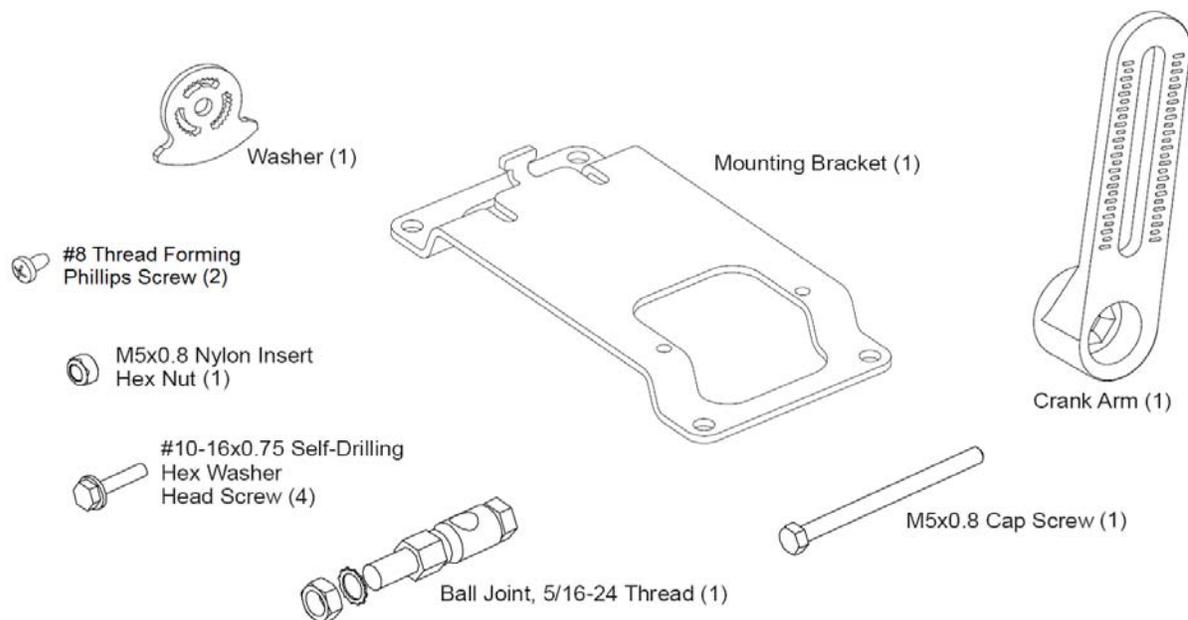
Parts Included in M9203-115 Remote Mounting Kit
